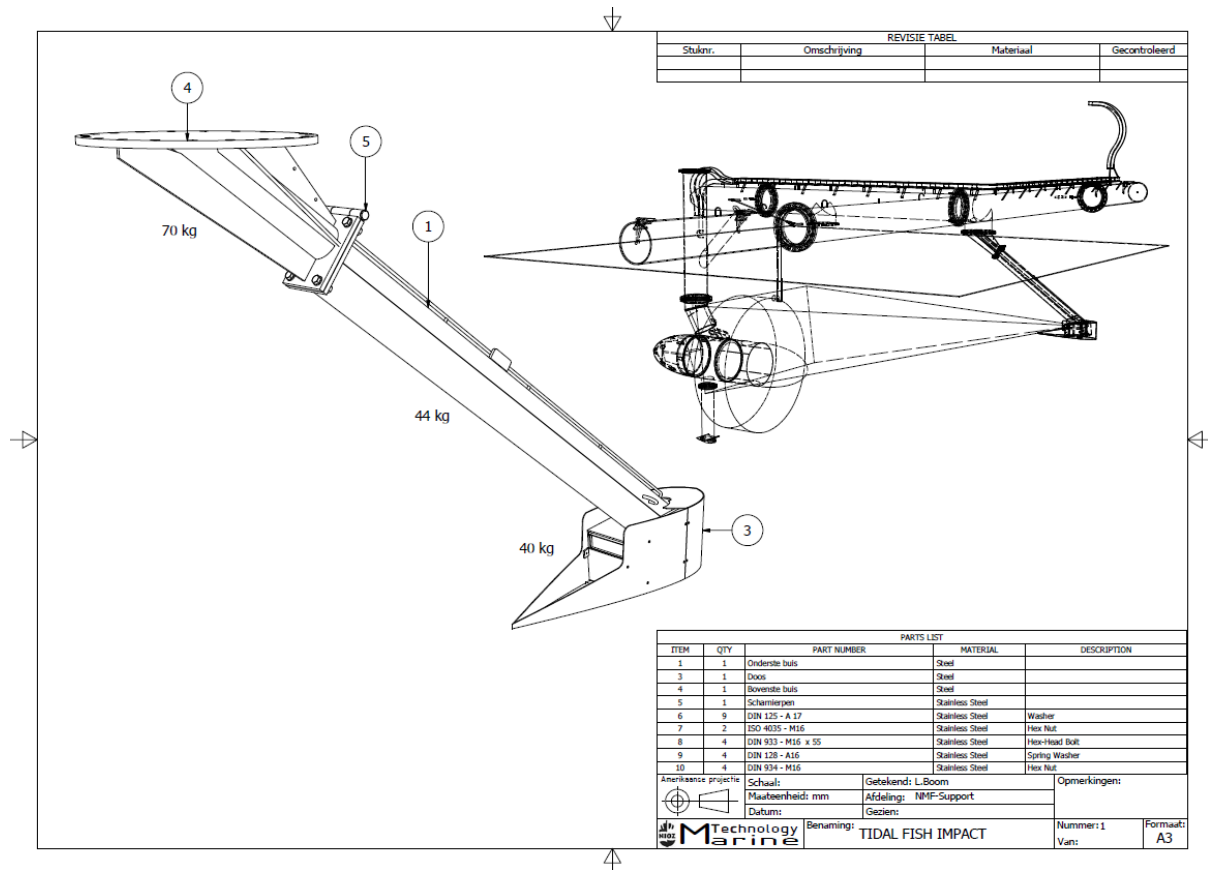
Technical drawing of the housing design for the DIDSON measurements at Den Oever (see Appendix for further detail drawings)
